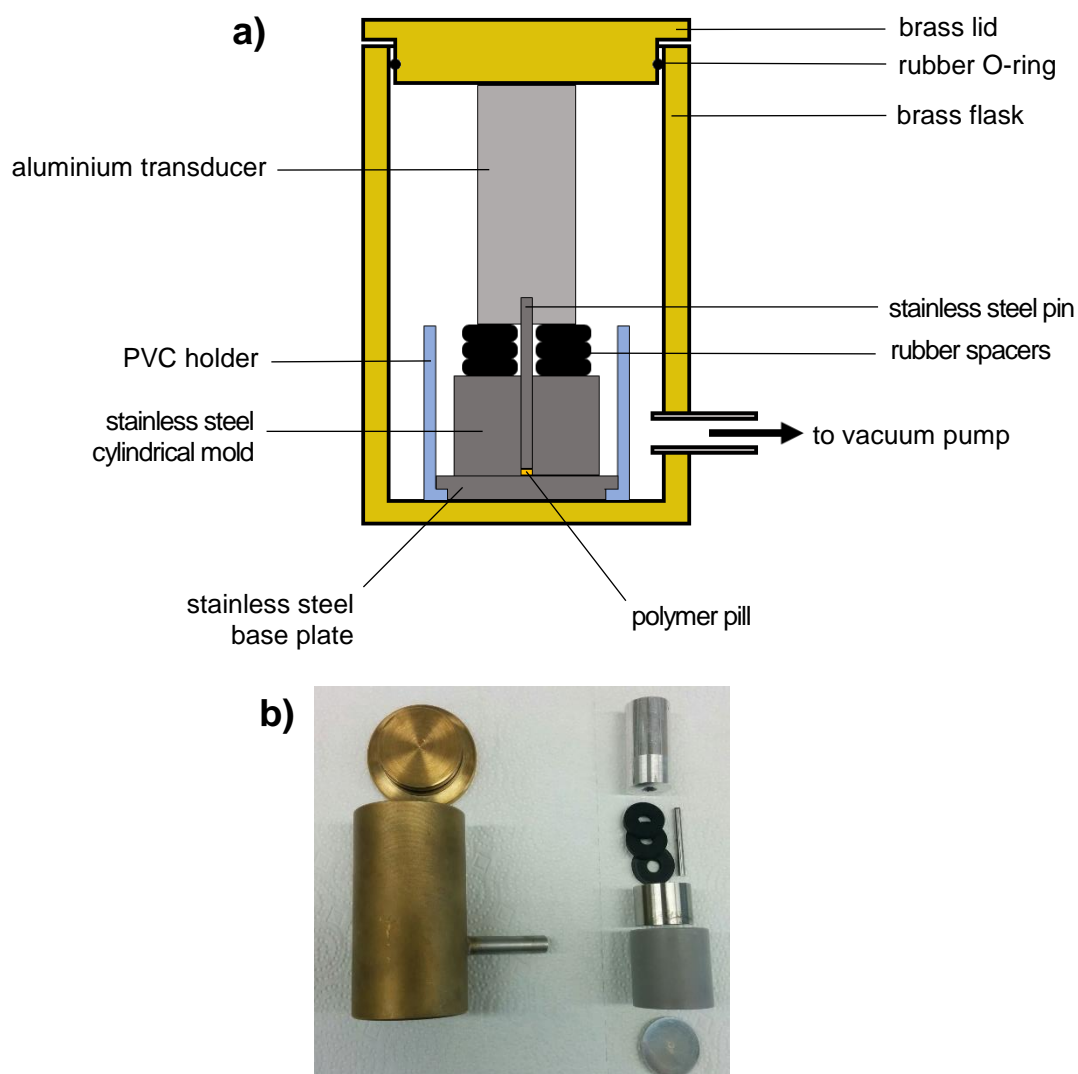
Schematic cross-section of the assembled compression molding setup used for hot-pressing of DP samples; b) photograph of the disassembled device.
